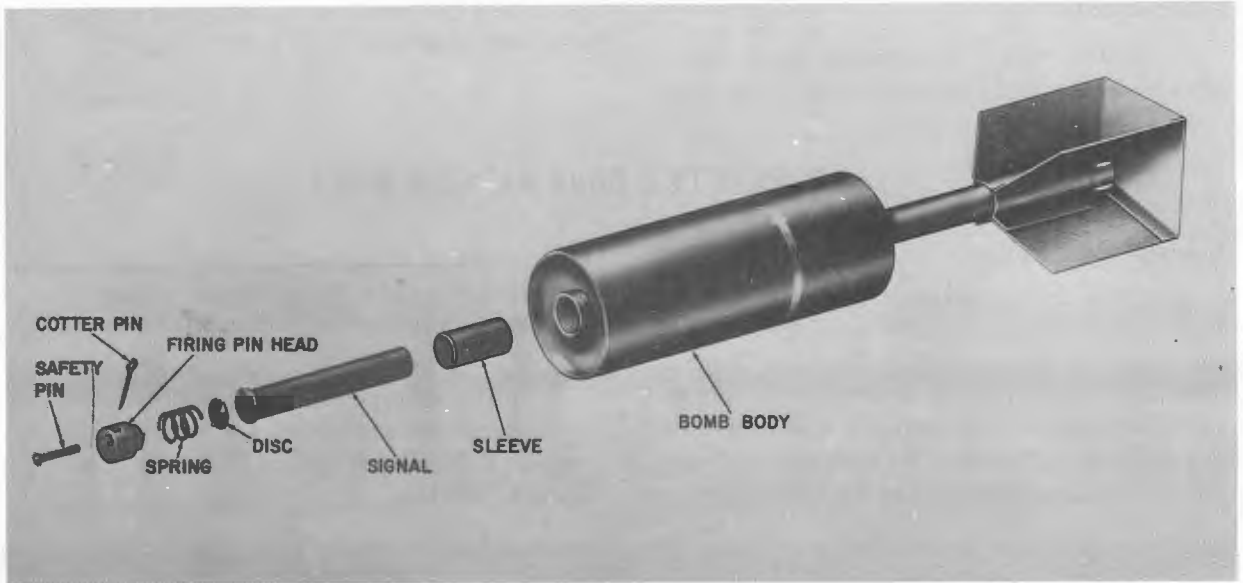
5-lb Practice Bomb Mark 106 Mod 2, Exploded View.
